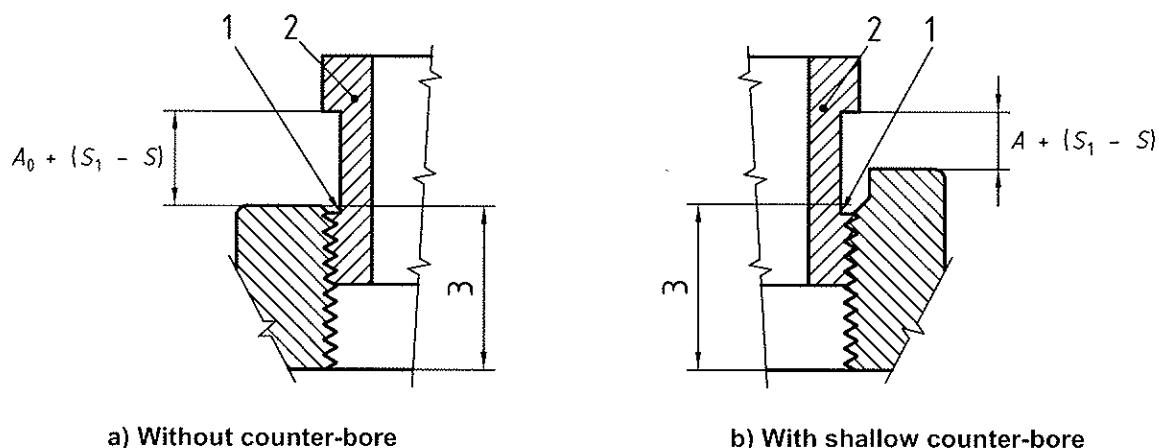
Gauging practice for line-pipe, casing and tubing internal threads, hand-tight assembly
